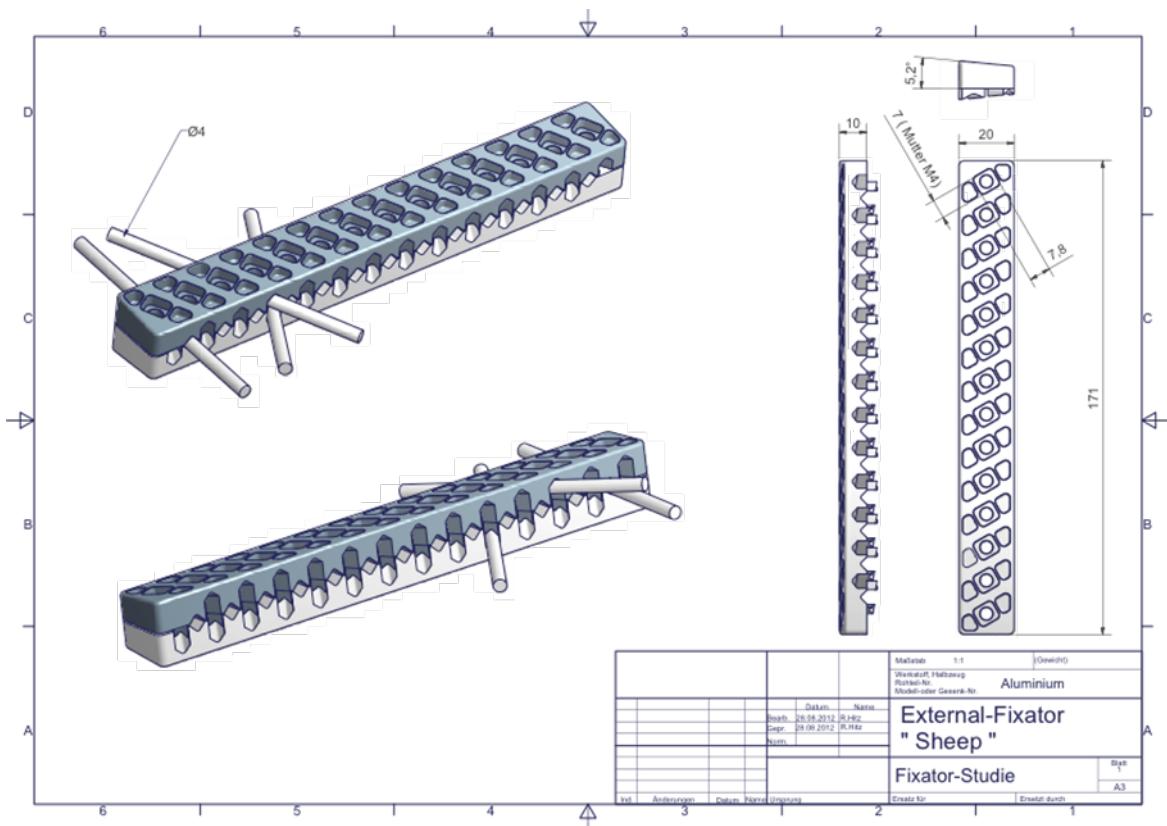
A technical drawing of the adjustable stiffness external fixator for use in a sheep tibial critical-size defect model.
